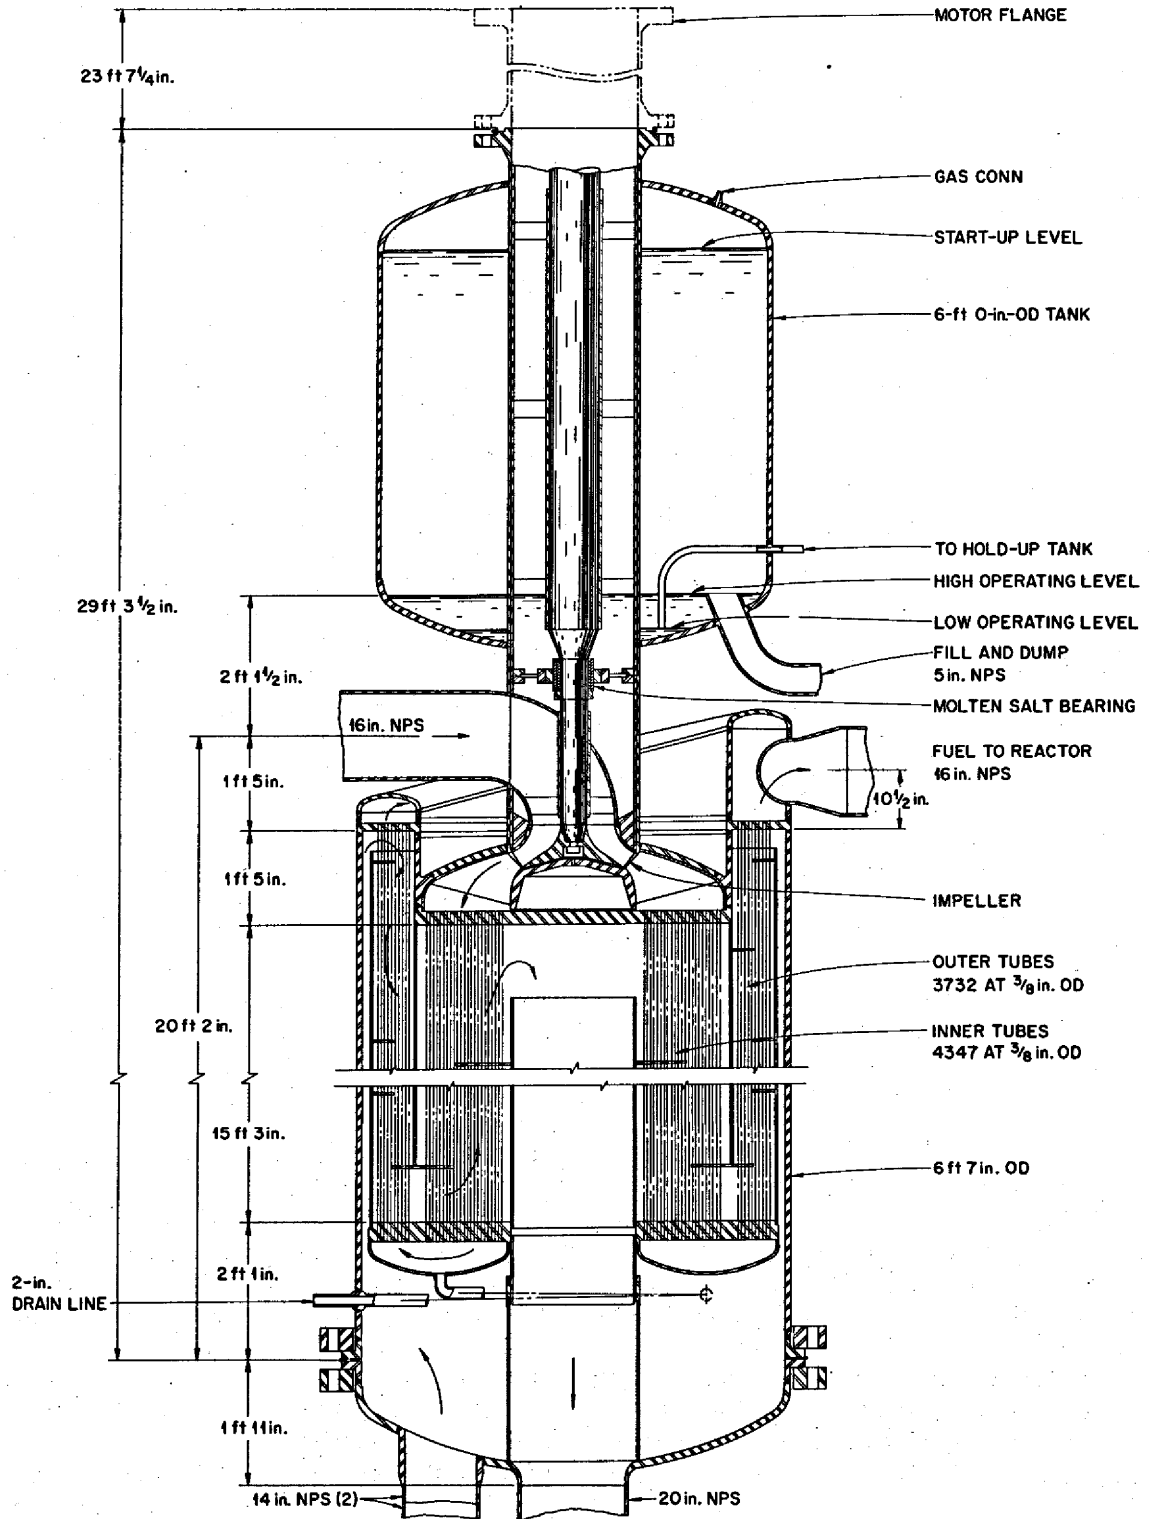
Fuel Salt Primary Heat Exchanger and Pump Assembly for 250-Mw(e) Reactor Module.
